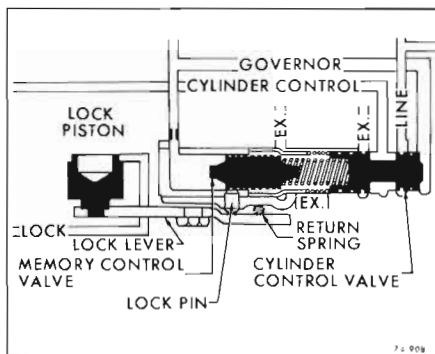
Memory Control Valve, Cyl. Control Valve and Lock Piston System
